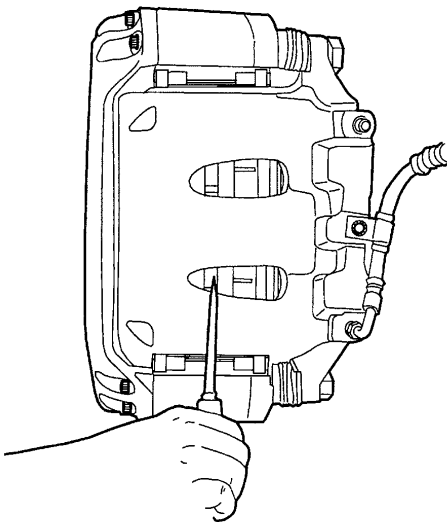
Push Caliper Outboard Pushing Pistons into Piston Bores
